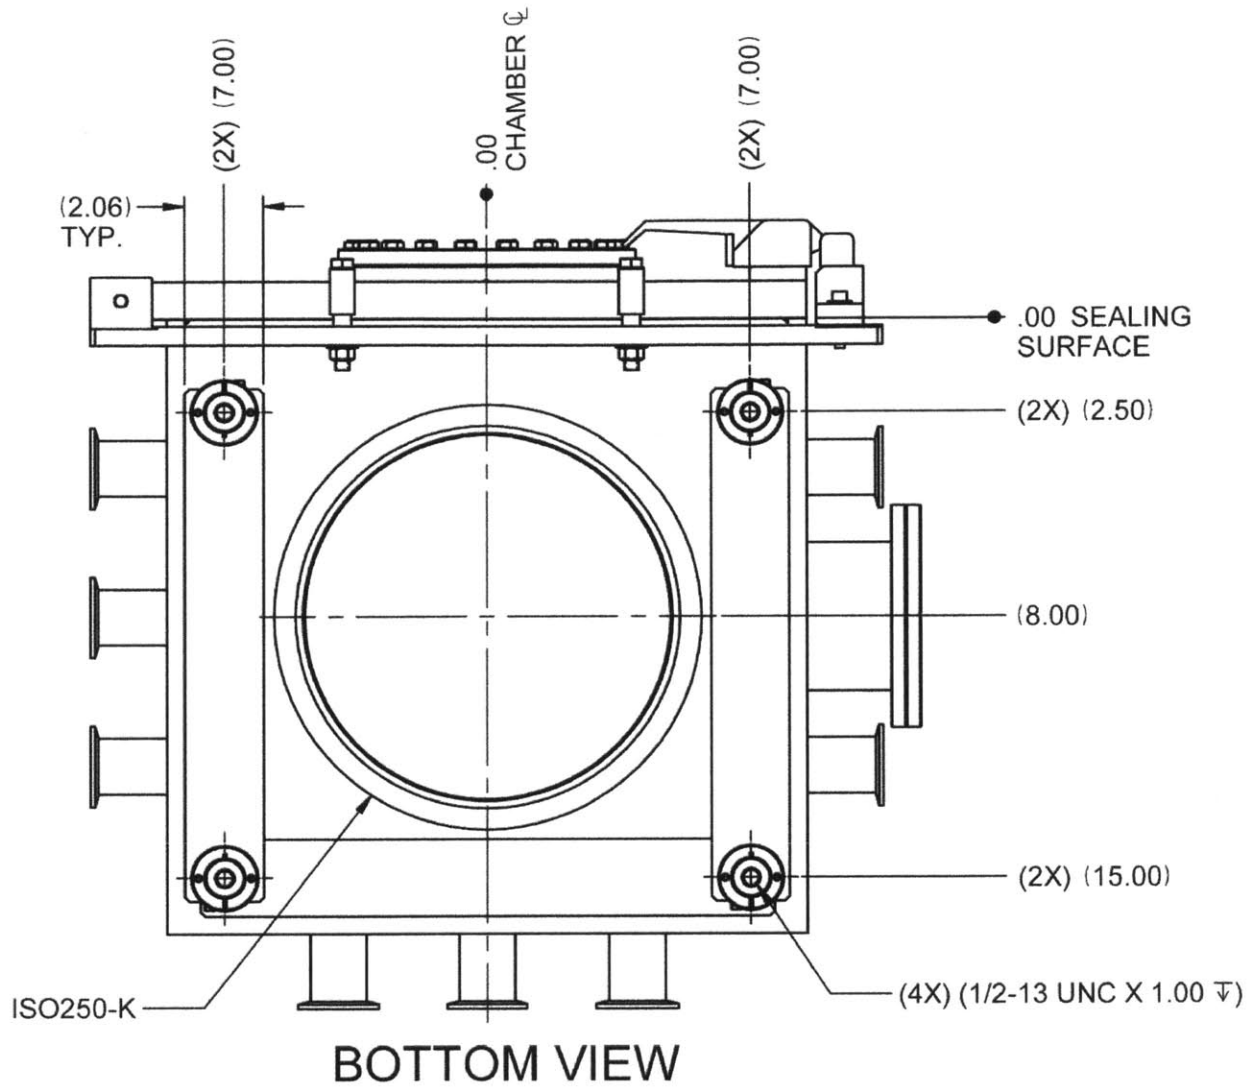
oCVD reactor chamber engineering drawing—bottom view. Dimensions in inches.
